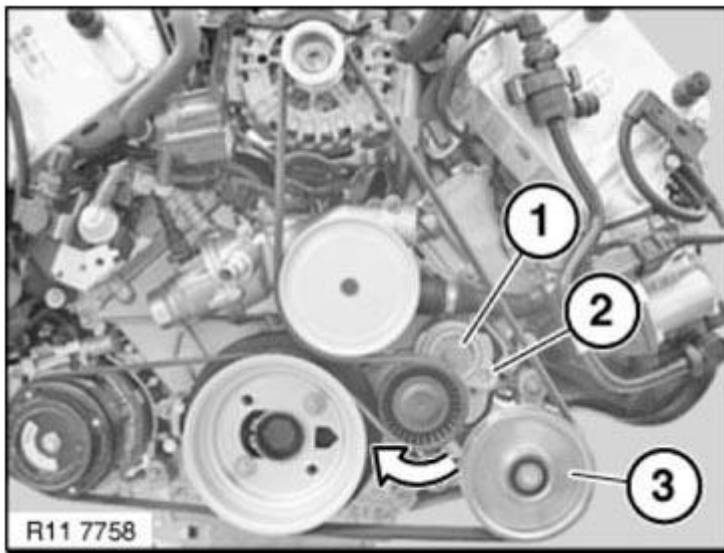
Identifying Belt Tensioner Tensioning Direction
